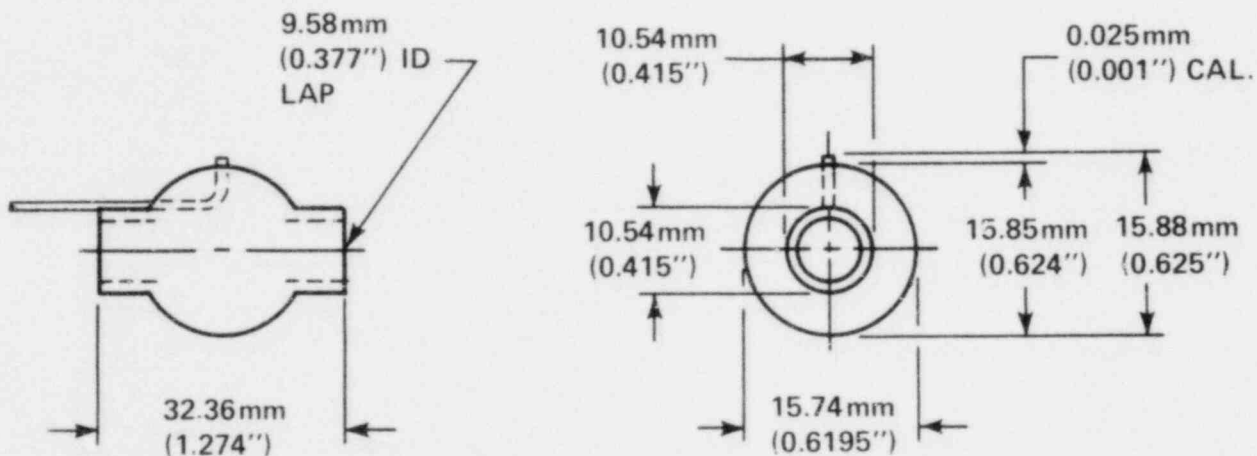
Blockage Sleeve at 2.29 m (90 in.) Elevation (Posttest)
